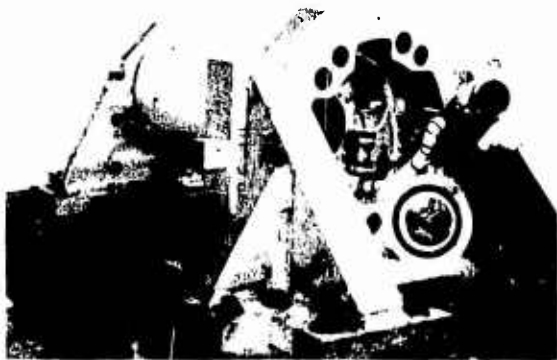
MSA accelerometer attached to tail cone vibration fixture
